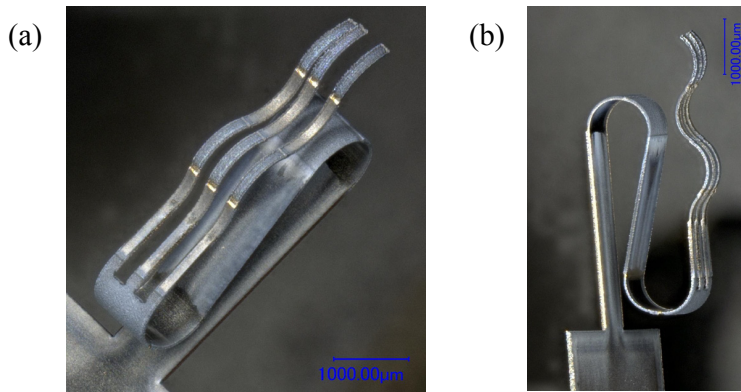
Example of S-bending: (a) Front view; (b) Side view.
